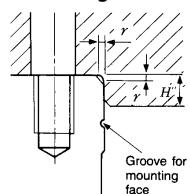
Ball Slide Datum Face Mounting Part
